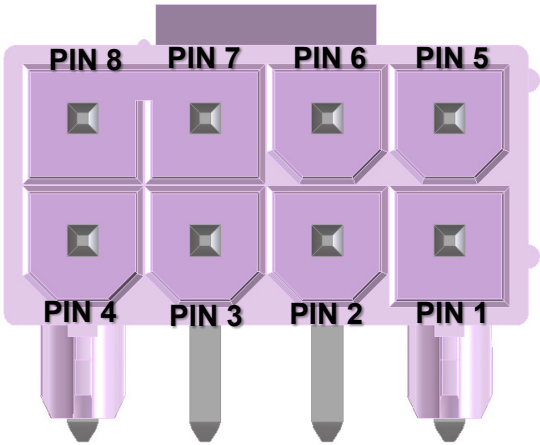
2 x 4 Auxiliary Power Connector Receptacle Side Pin-out
